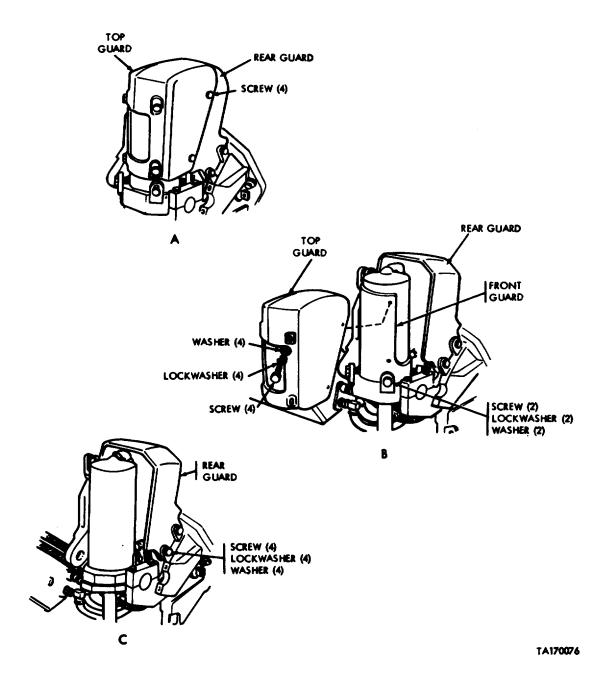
Removal or installation of cylinder guards (sheet 1 of 2).
